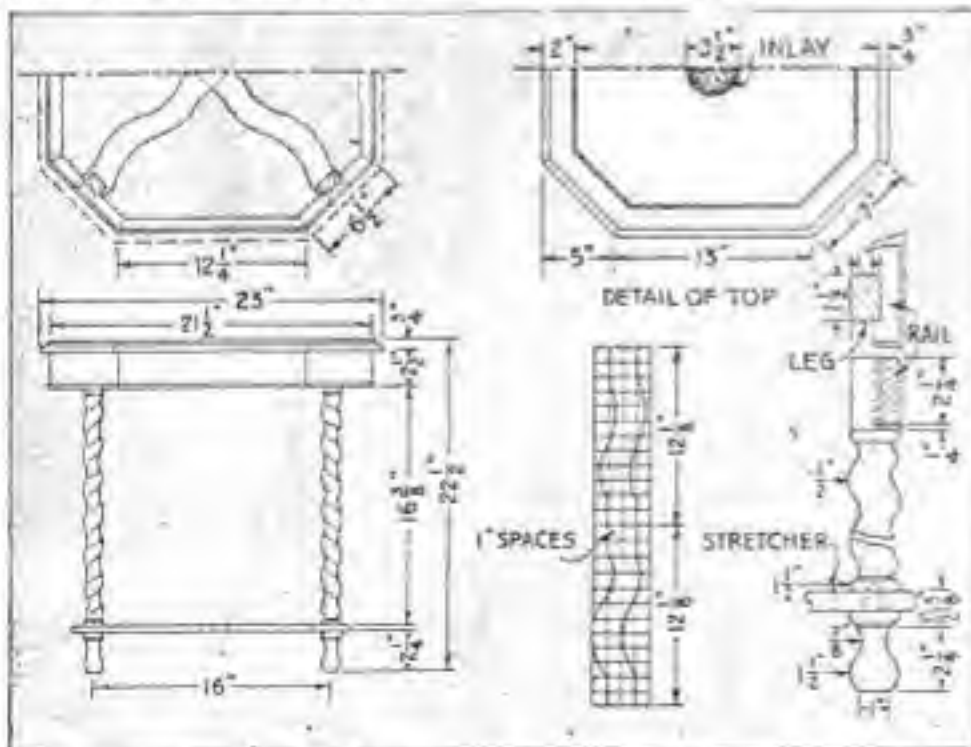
Assembly views and working details of a coffee table that is a typical example of spiral turnings.
